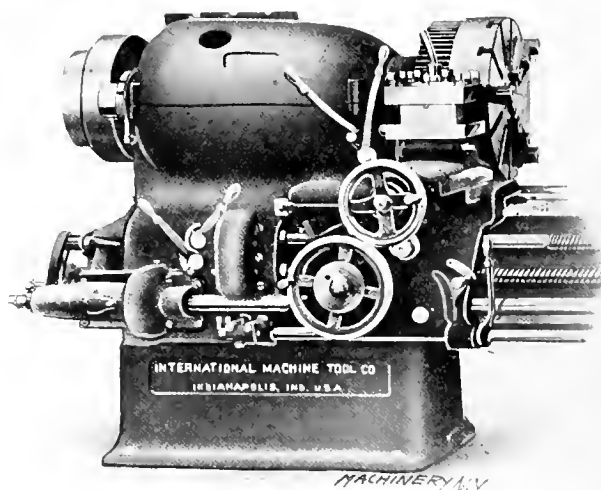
The Tool-post Carriage brought close to the Head-stock, showing how it clears the Chuck.
